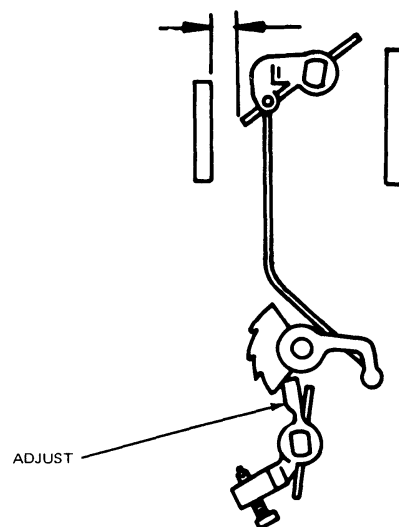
Dechoke—Holley 4180 C-4V (Hot Air Only) Carburetor
